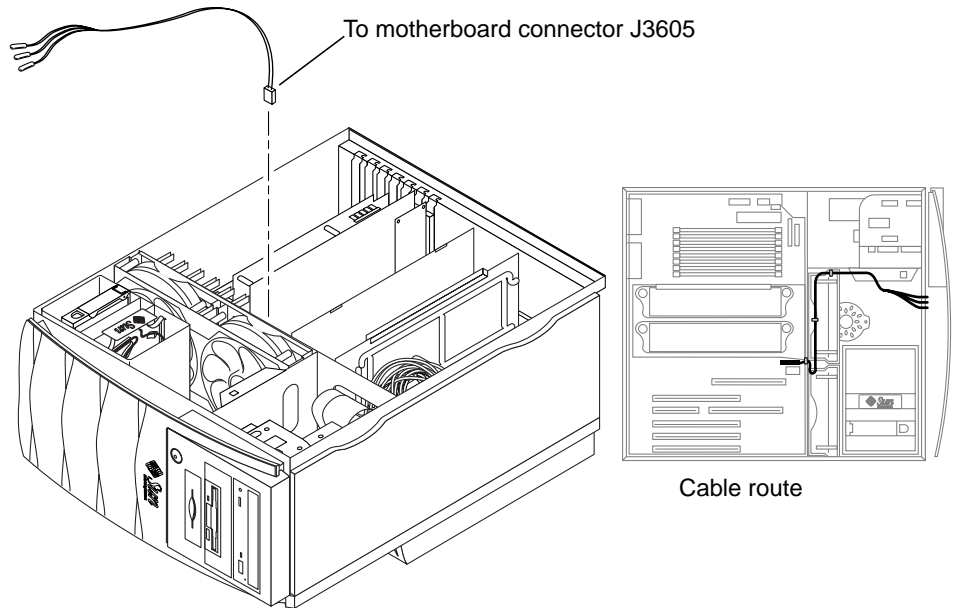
Removing and Replacing the Logo LED Cable Assembly
